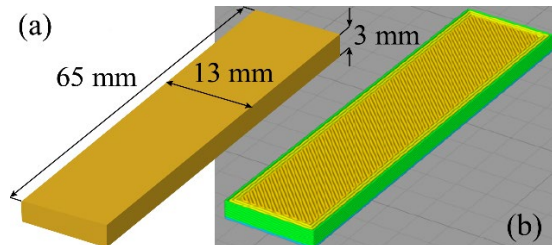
(a) Dimensions and (b) layered (sliced) view of a DMA specimen conforming to ASTM D790 Standard prepared for 3D printing using the Simplify3D slicing program.
